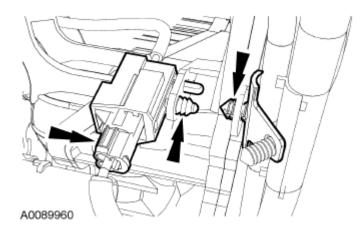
Locating Knock Sensor And Wiring Harness Retainers Courtesy of FORD MOTOR CO.
